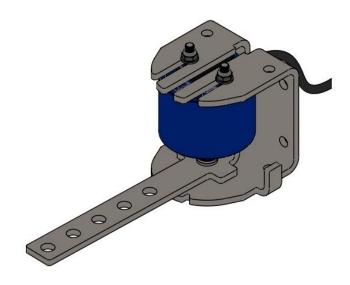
WAS ASSEMBLY, BRACKET, 12V 180°, 35CM, M12 CONNECTOR
